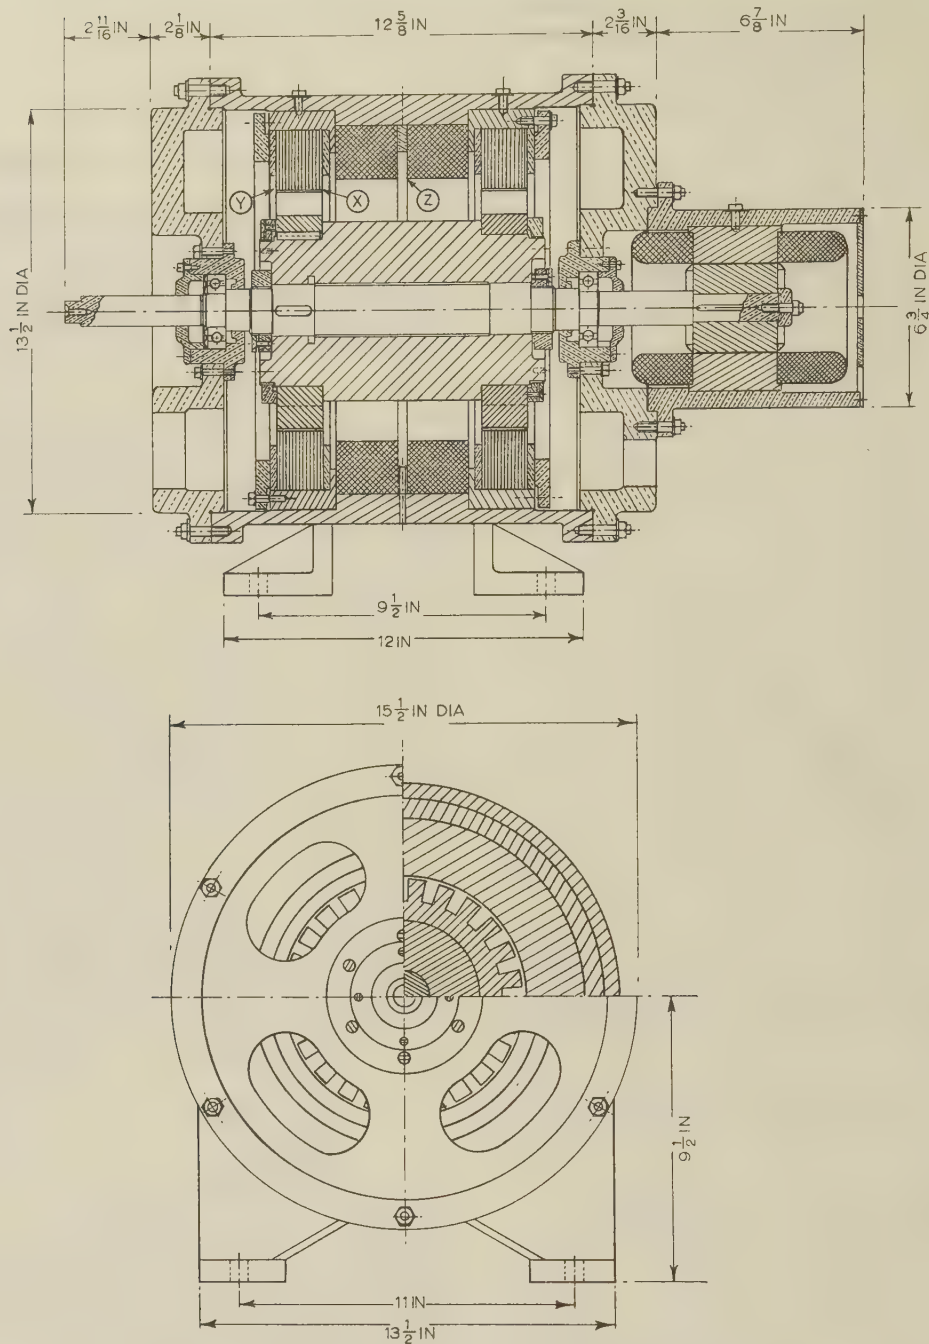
Sectional drawing of the experimental homopolar machine.
